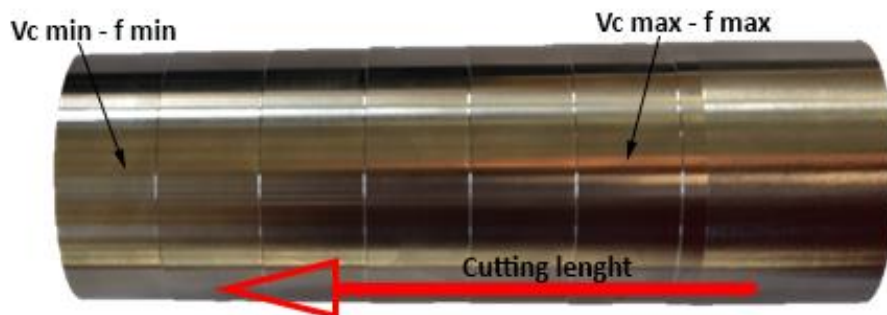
Machined workpiece after the six turning trials conducted under dry cooling condition.
